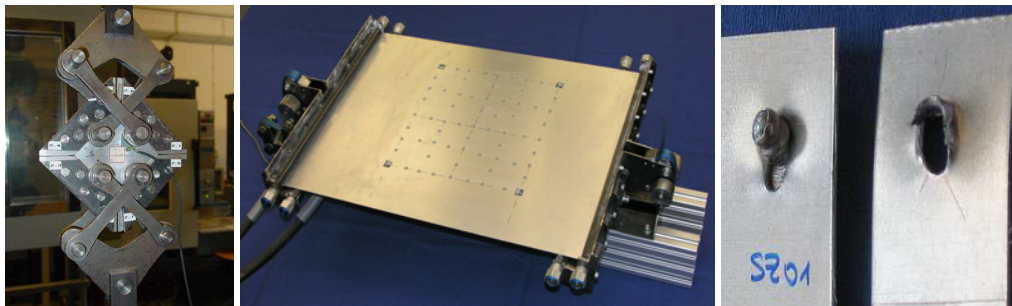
In plane shear test device, QFB testing device and joined specimens after tensile test
